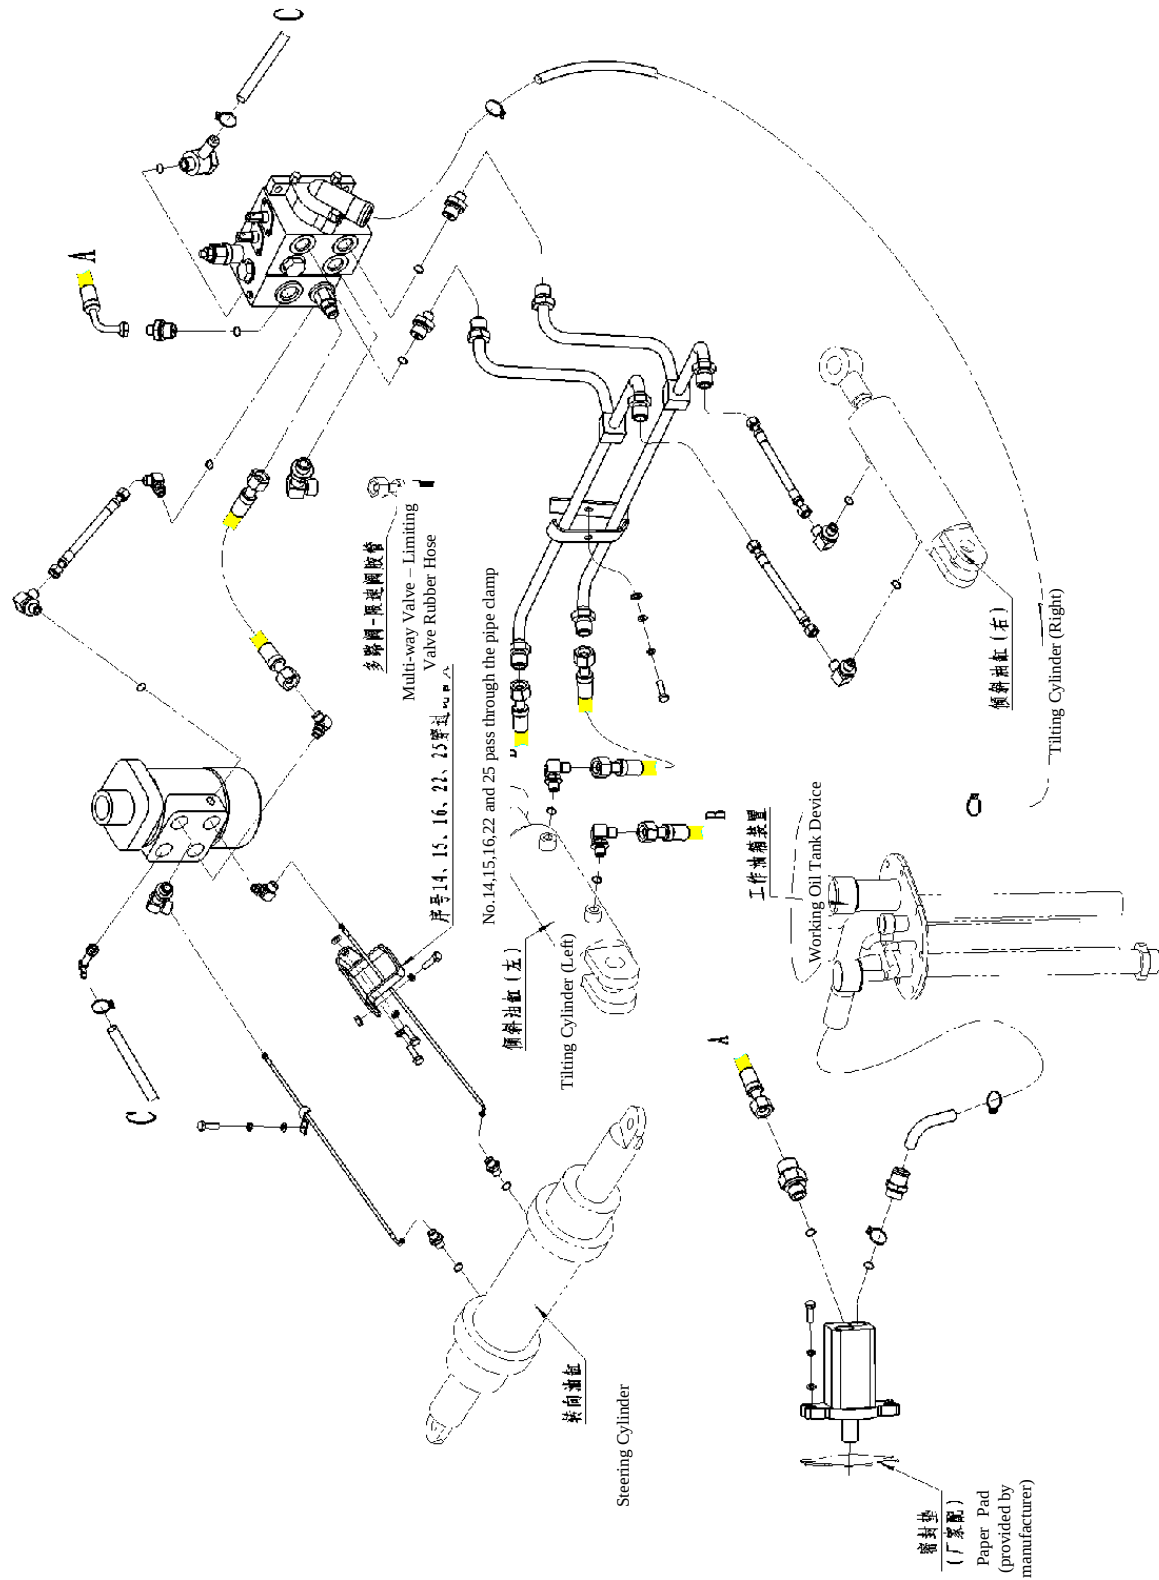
Schematic Drawing of Hydraulic Pipeline (Diesel Forklift Trucks)
